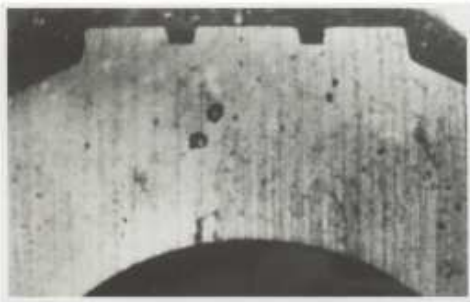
A sectioned aluminum engine block showing two large casting porosity "bubbles" made by gases during the casting process.
